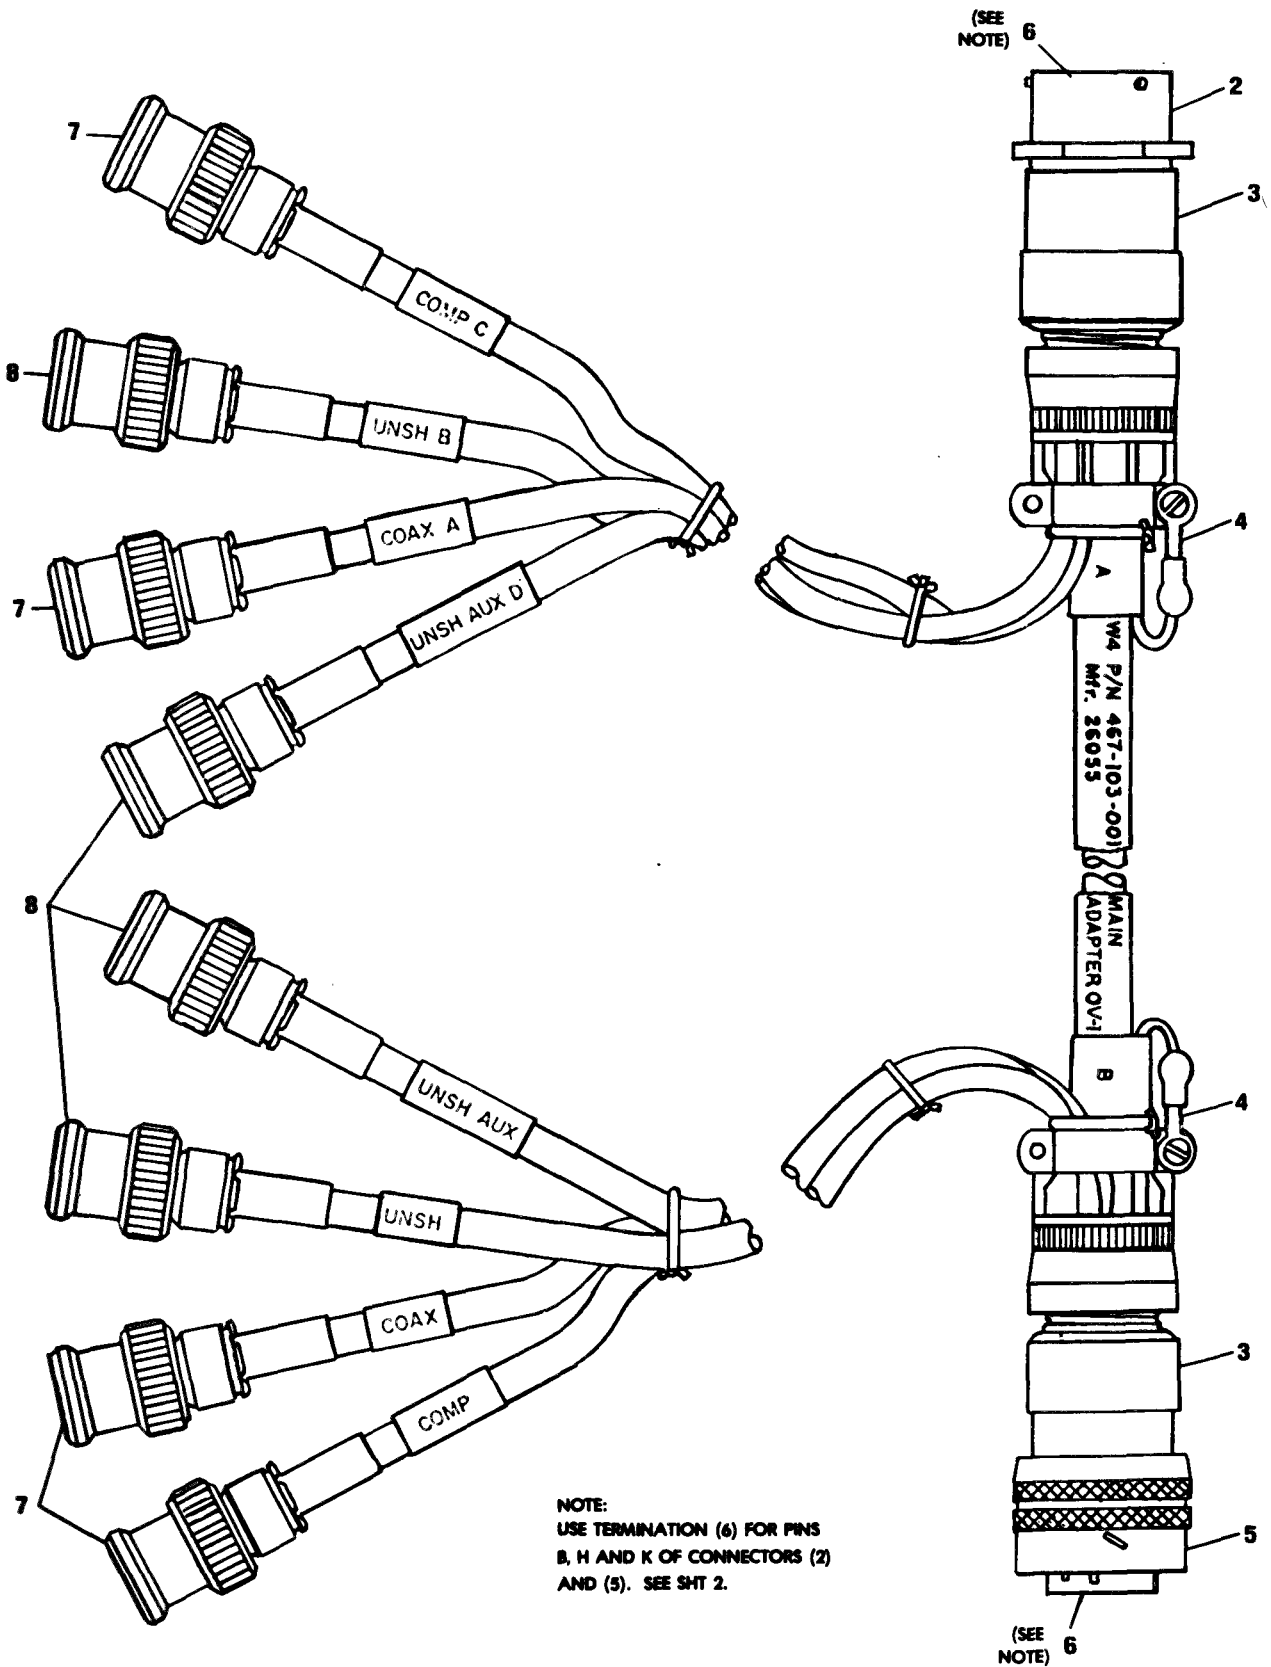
Main adapter cable assembly W4, part number 467-103-001 (sheet 1 of 2)
